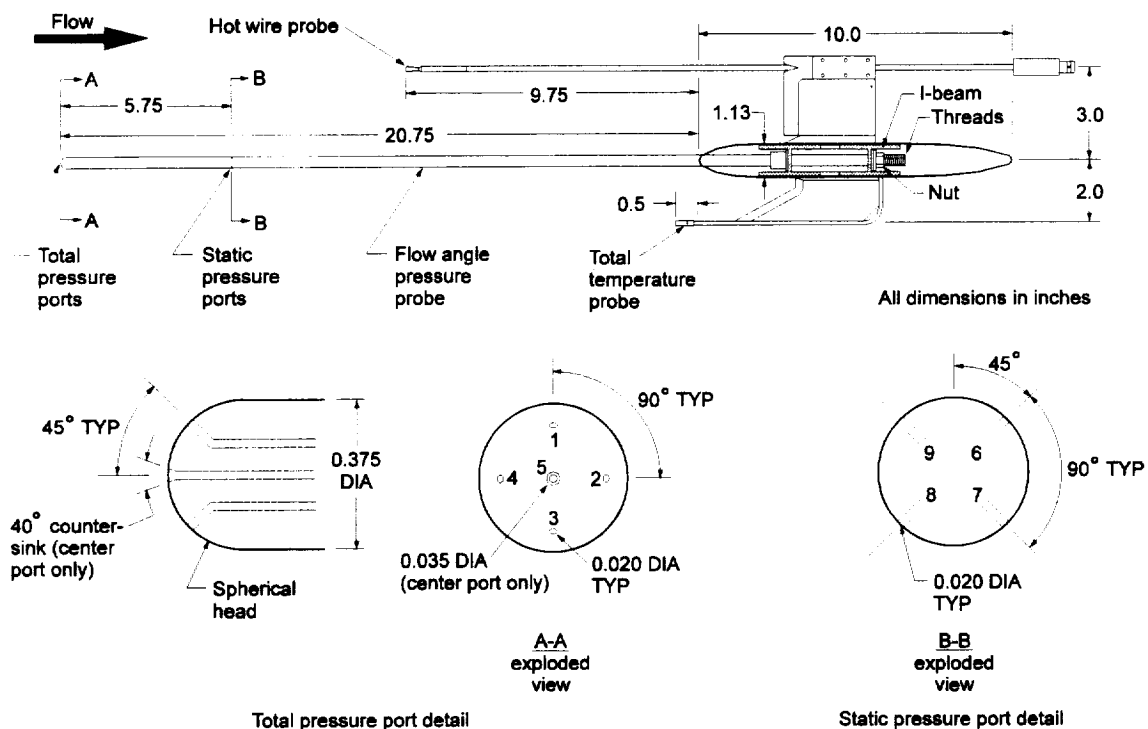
Cross section view of the 9-foot horizontal rake with exploded views of the flow angle pressure probe ports.
